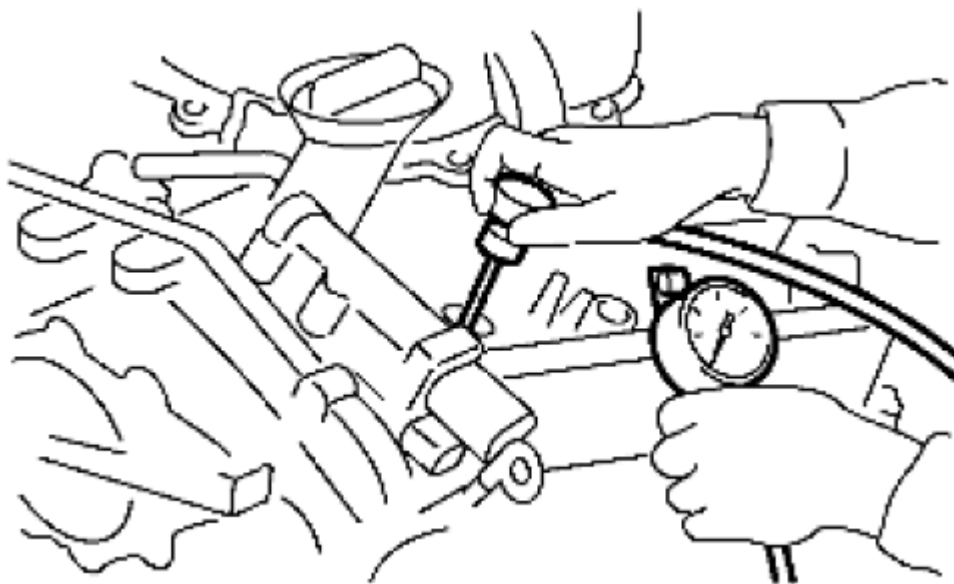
Installing Compression Tester With Adapter Onto Spark Plug Hole
